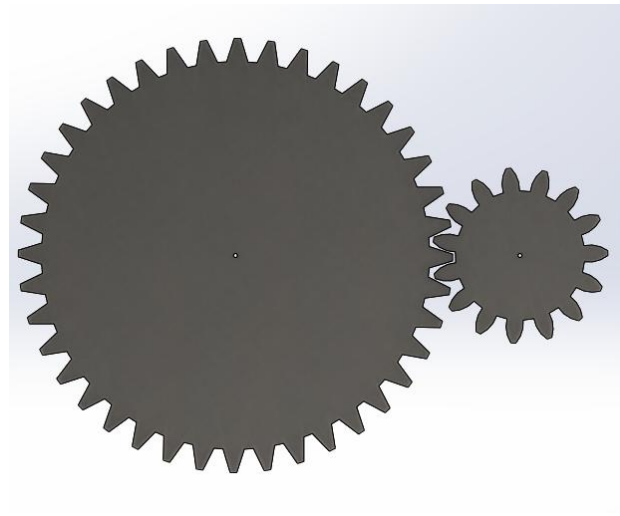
Spur gears utilize straight teeth, causing rough engagement and disengagement.
